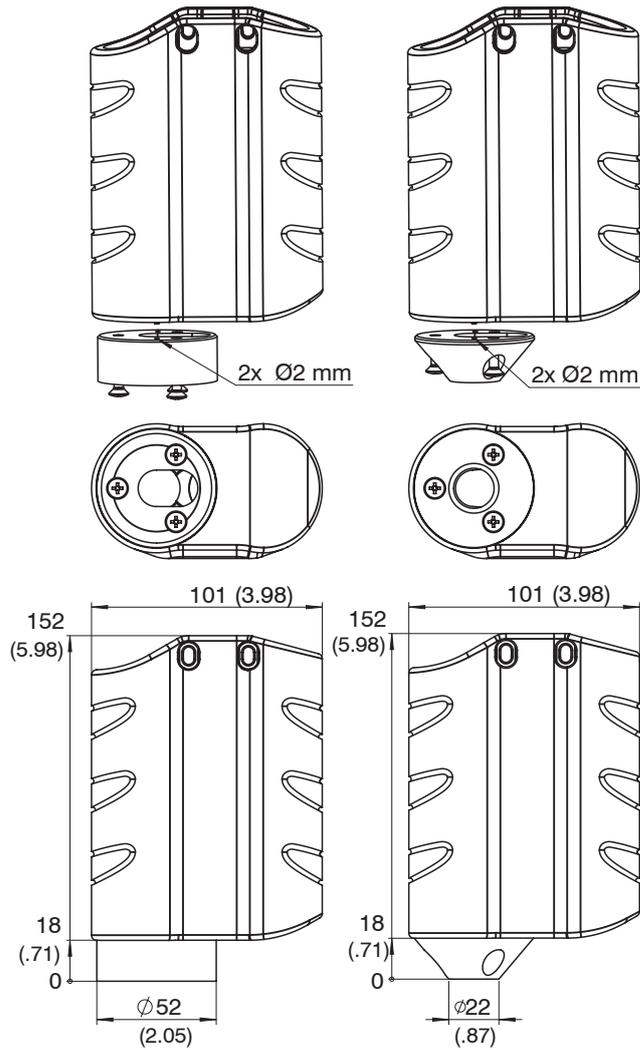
FCS-X-ACS2-R45/0-28-XXXX circular sensor dimensional drawing
